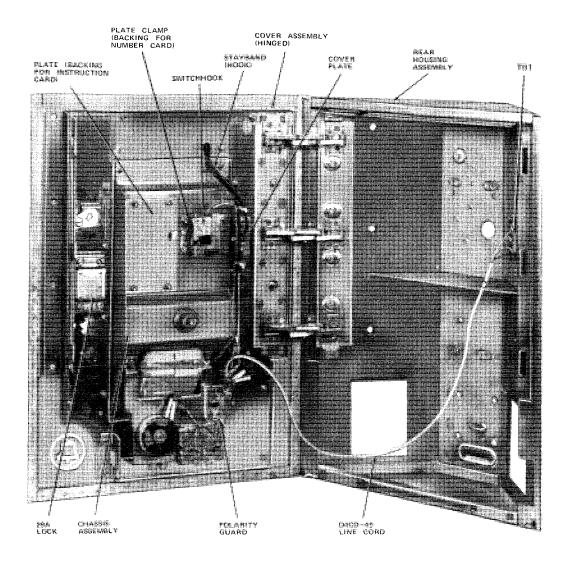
A Coinless Telephone Set With Cover Assembly Opened
